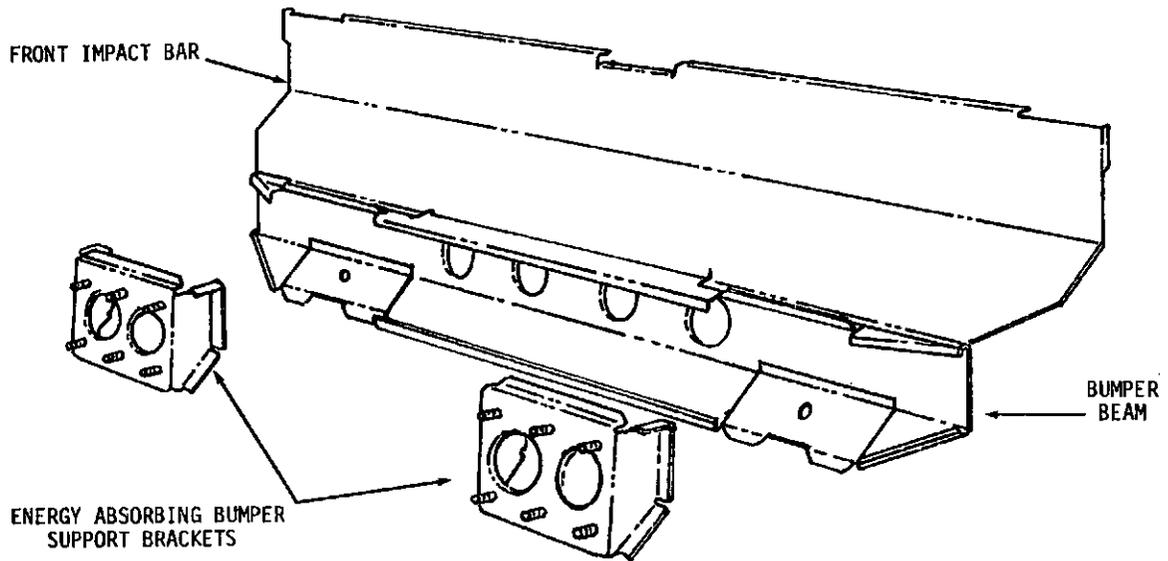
FRONT BUMPER WELDMENT
